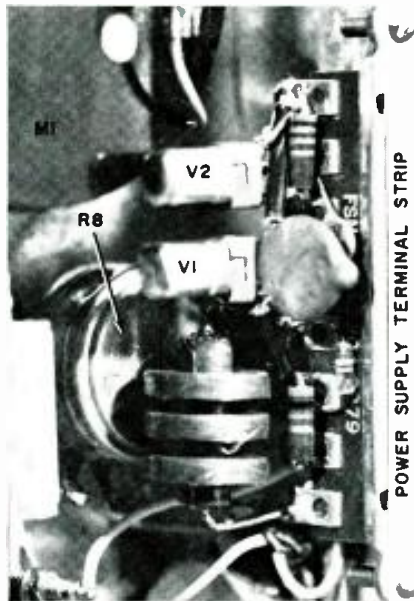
Detail, from rear, of terminal strip on which power supply is mounted.
